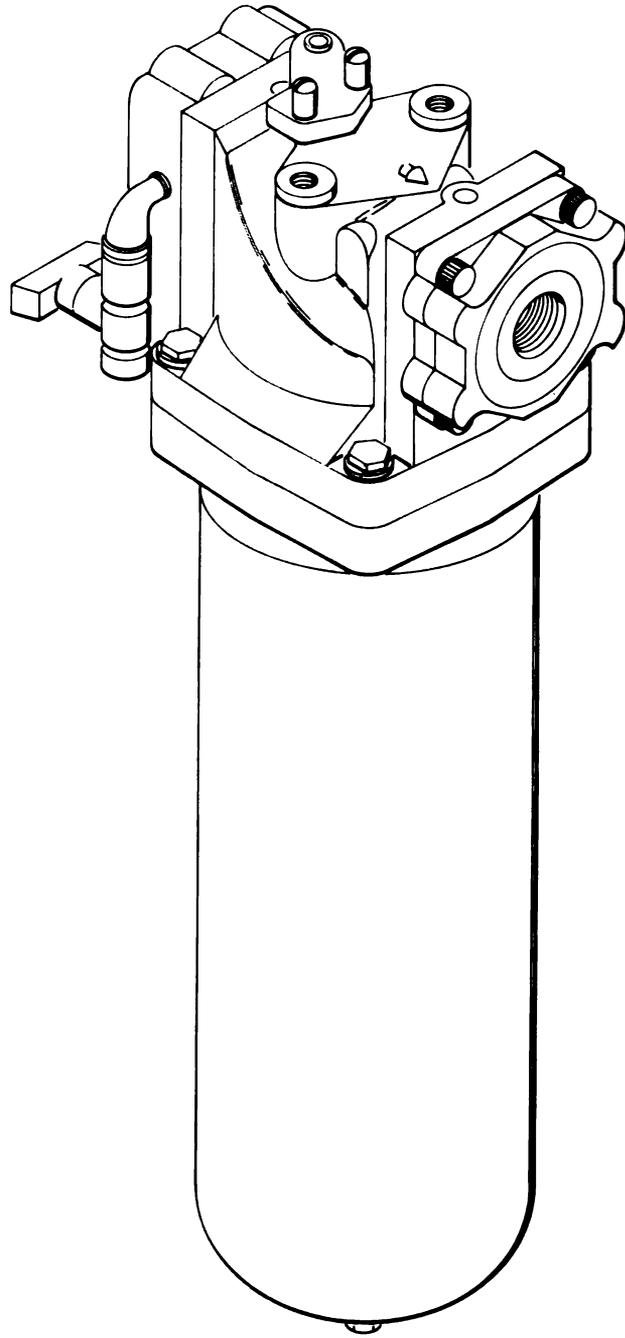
, Sheet 1 of 2. Hydraulic Systems Flushing Filter (Assembly).
